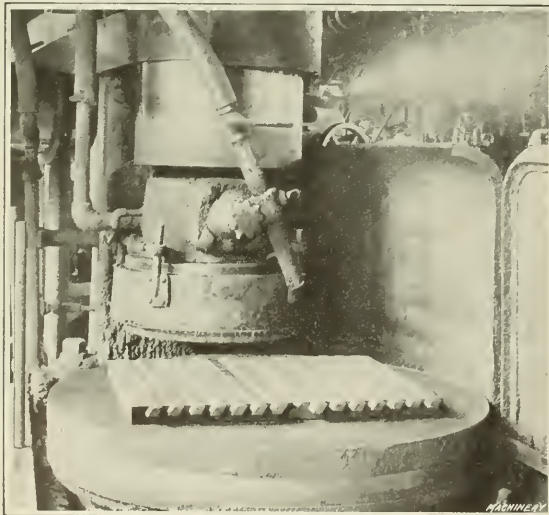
Special Fixture for holding Gibs on Blanchard Magnetic Chuck
